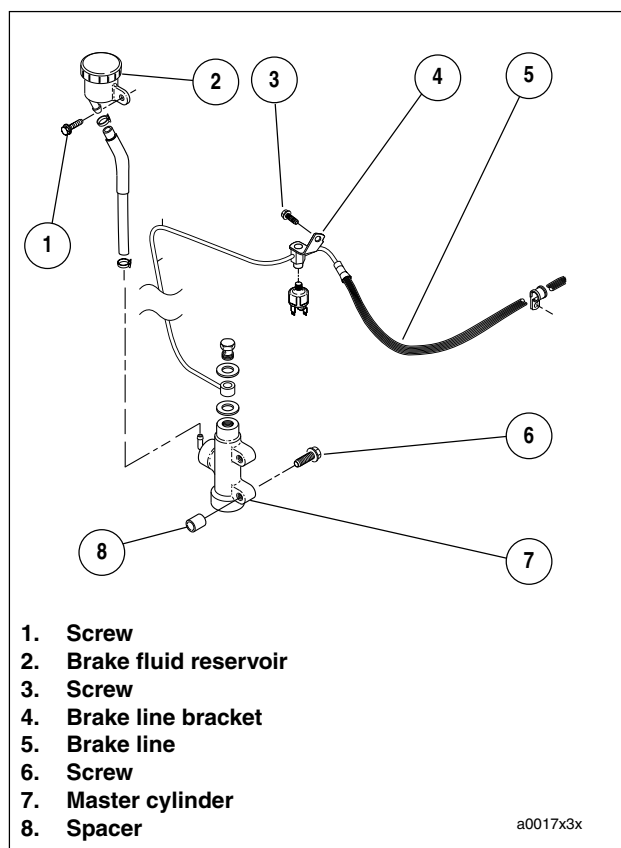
Rear Master Cylinder and Brake Line Assembly
